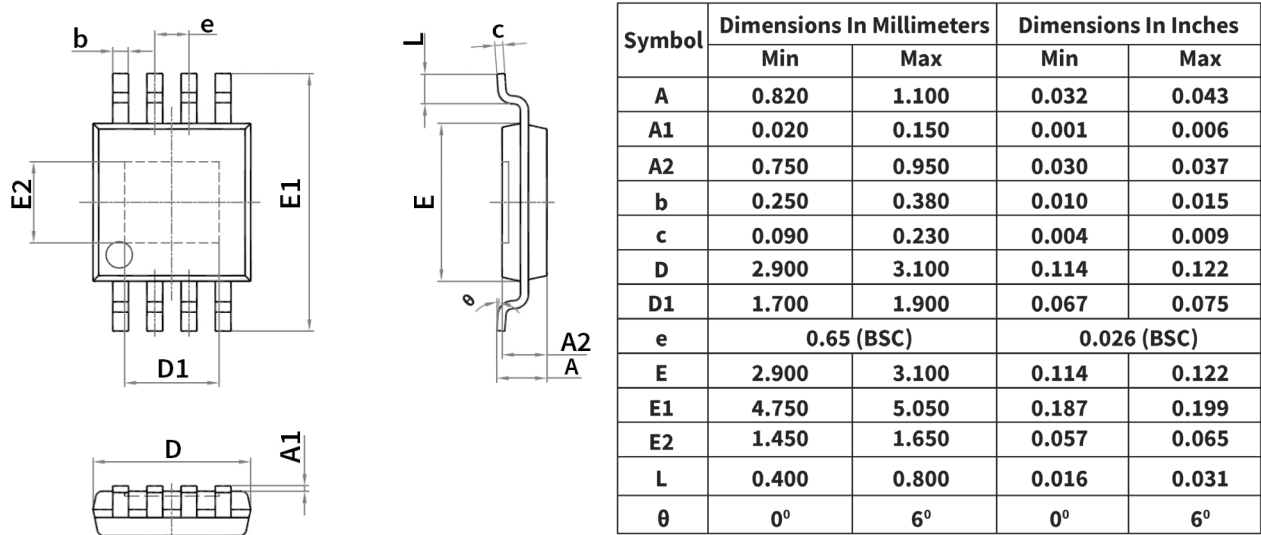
EP-MSOP8 Package Shape and Dimension
